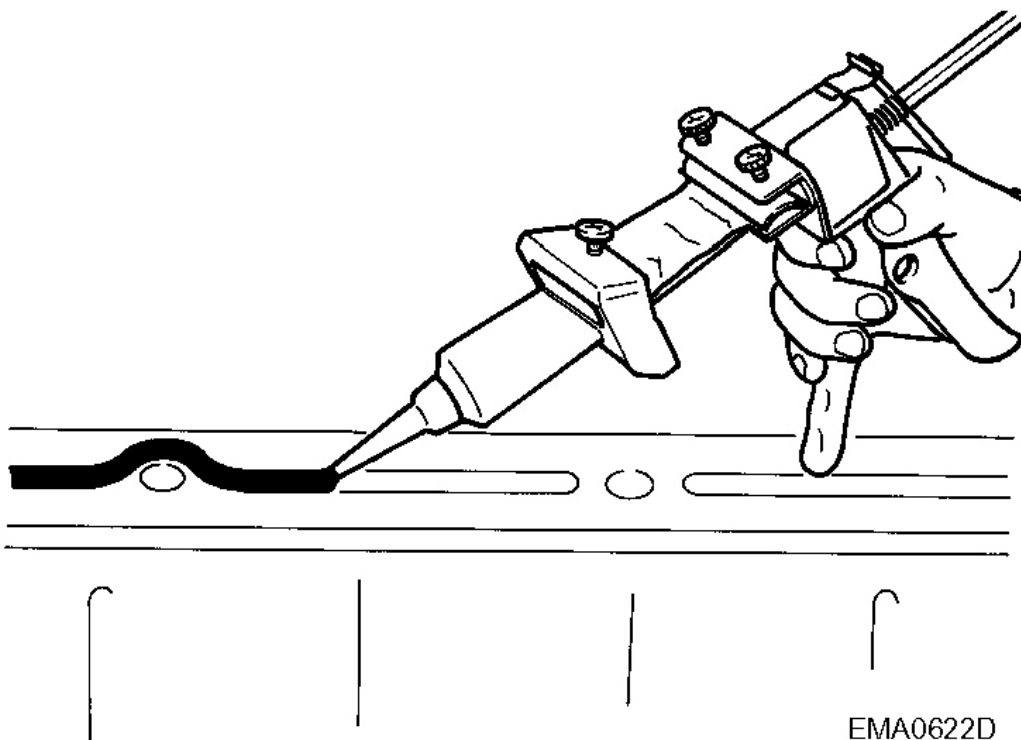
Applying Liquid Gasket Tube To Tube Presser
